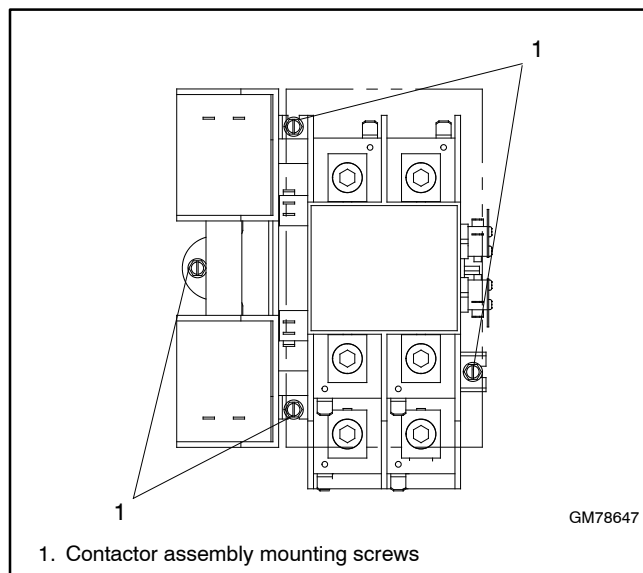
Contactor Mounting Screws, 100–200 Amp Models, Typical
